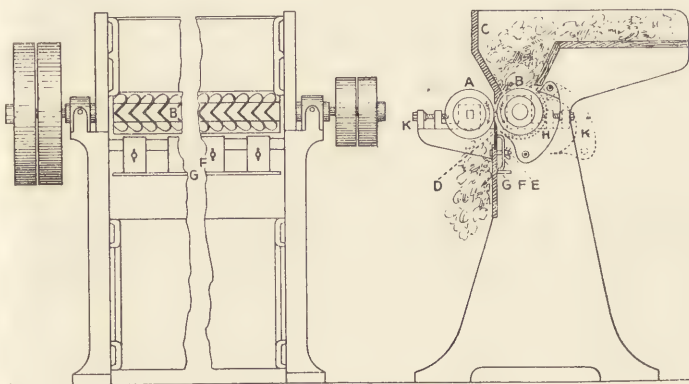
KNIFE ROLLER GIN, TWO SECTIONS.
